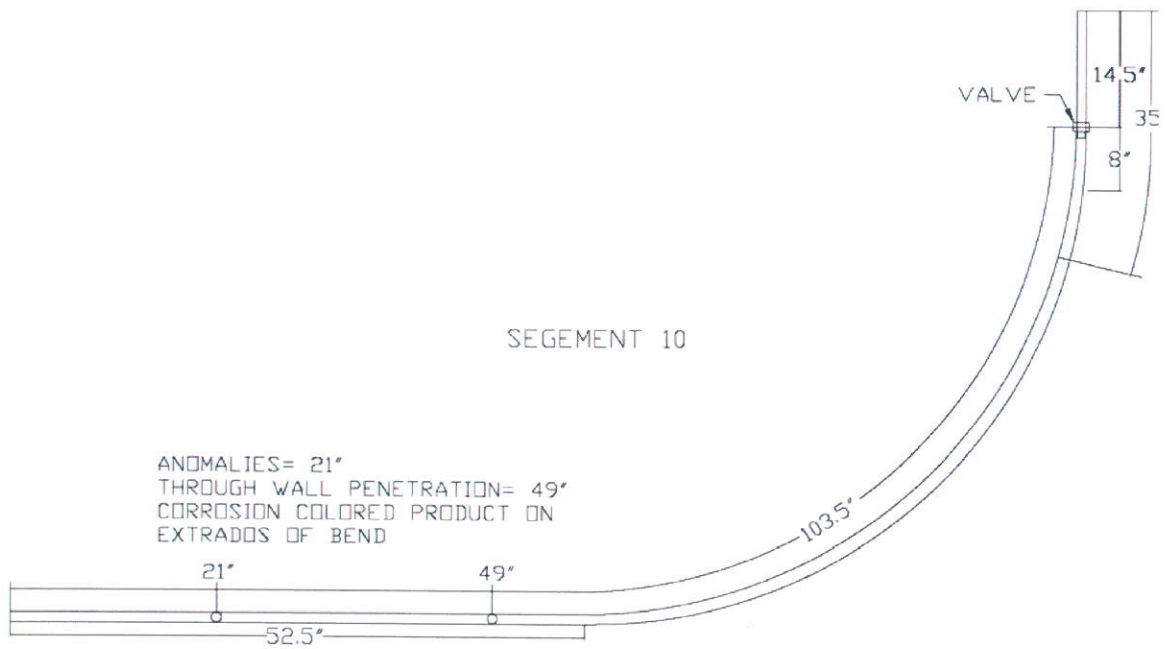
CAD schematic of Sample 10 showing anomalies, through wall penetration, and valve on pipe after coating removal.
